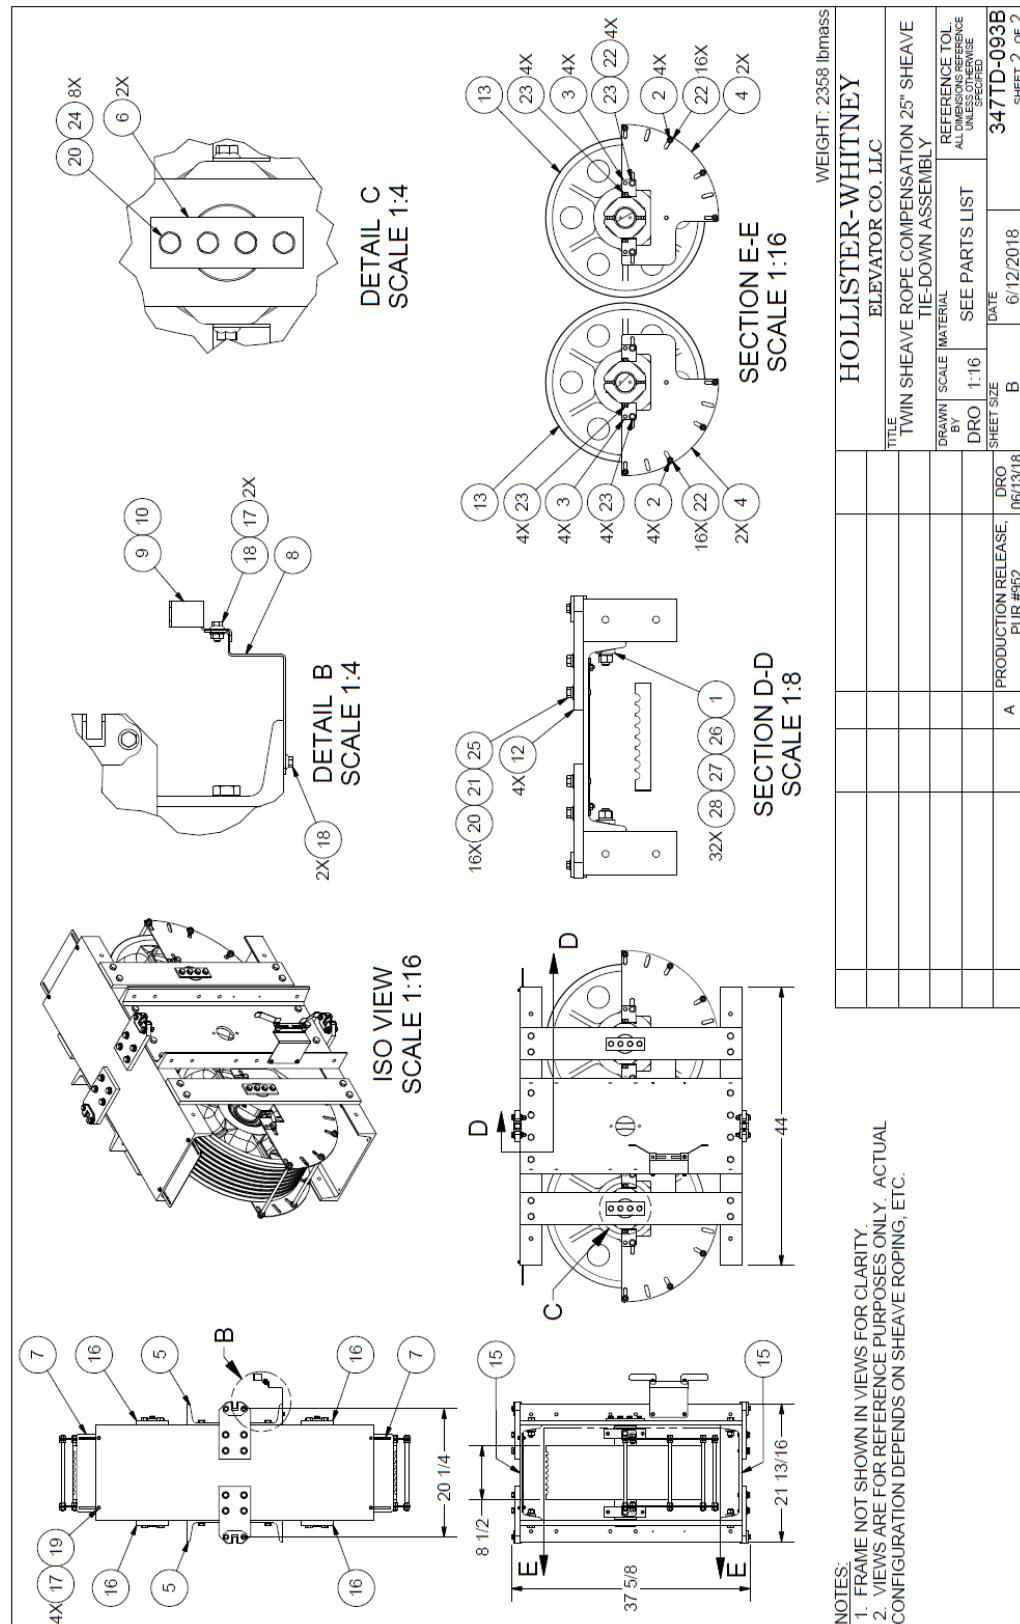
Model #347 Twin Ø25" Sheave Sheet-2
